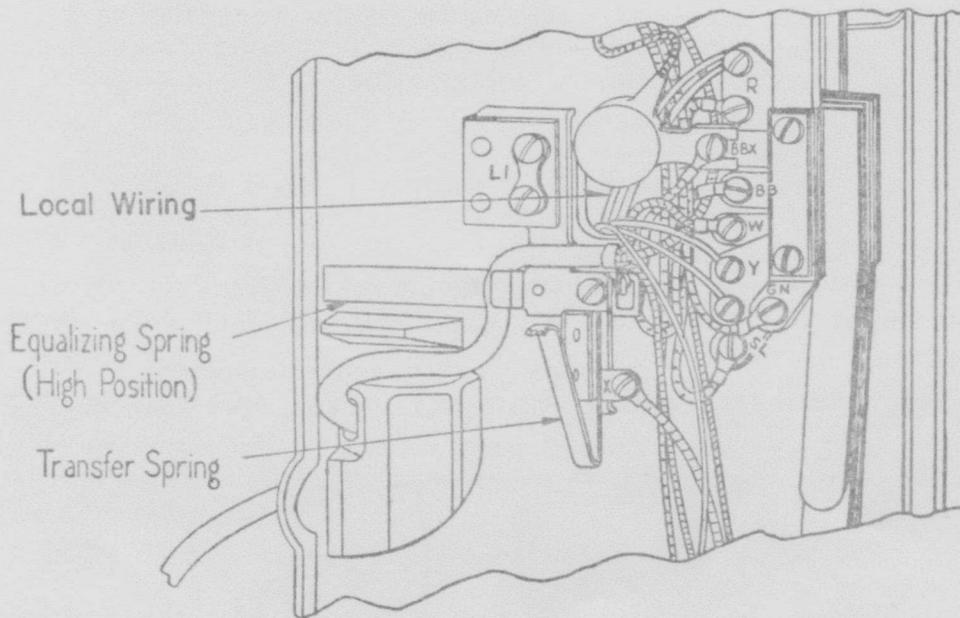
D-179432 or D-179433 Coin Collector—Backplate Assembly
